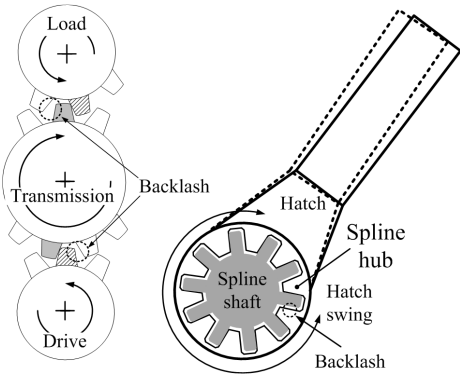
The schematic of the gear assembly and spline dead zone by backlash
